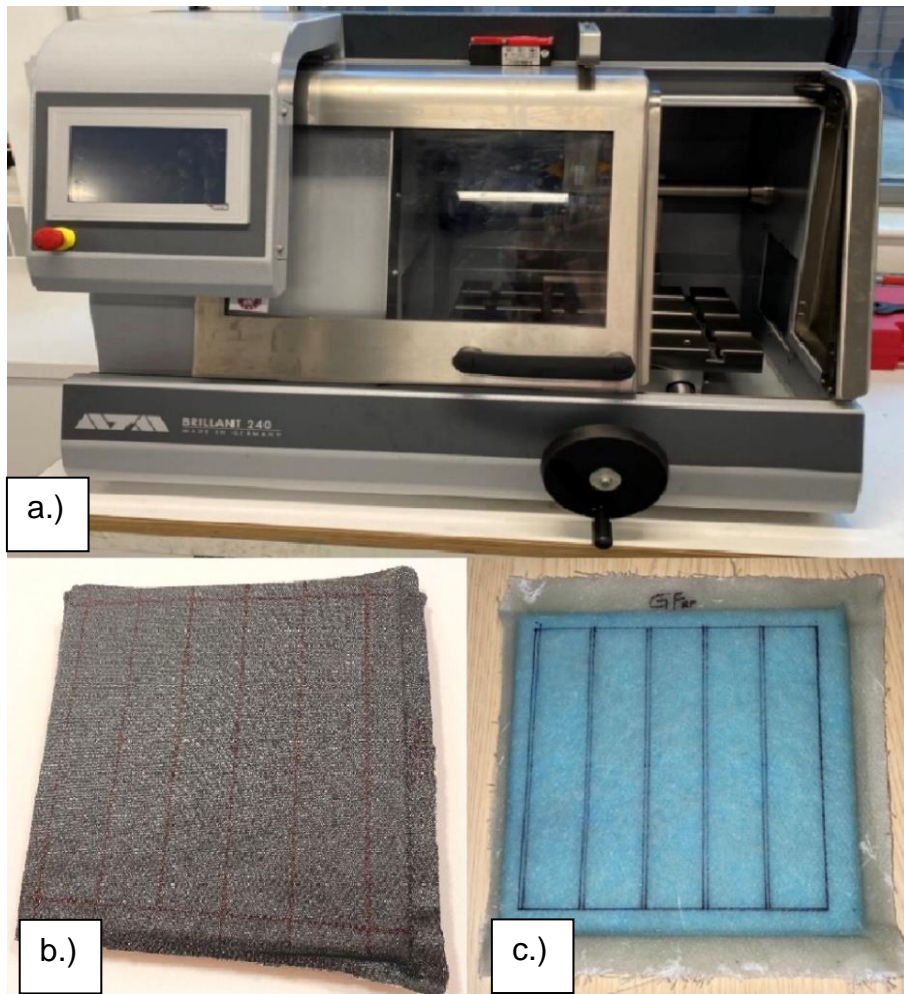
a.) Brilliant ATAI 420 cutting machine, b.) RCF, and c.) CSMG sandwich panels ready for cutting.
